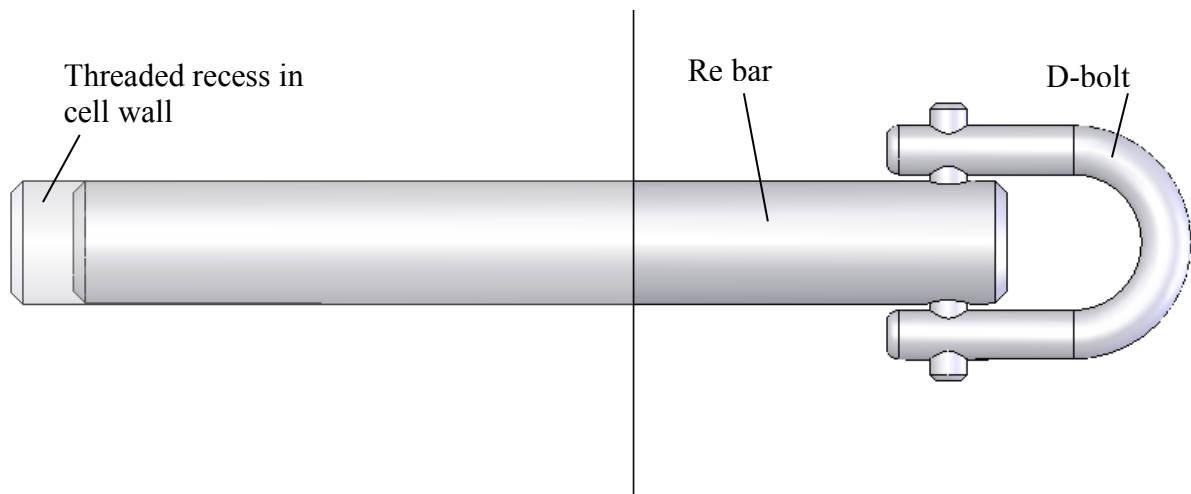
Test Cell Wall Attachment and D-Bolt Interface
